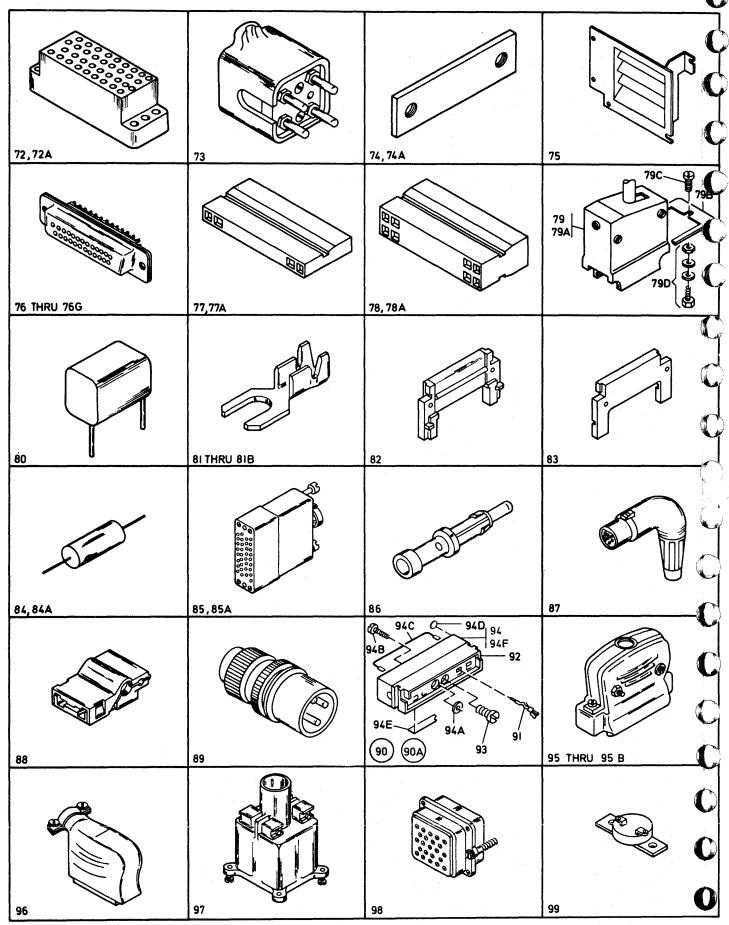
CABLE ASSEMBLIES WITH COMPONENT PARTS (SHEET 4 OF 6, INDEX NO. 72 THRU 99)
